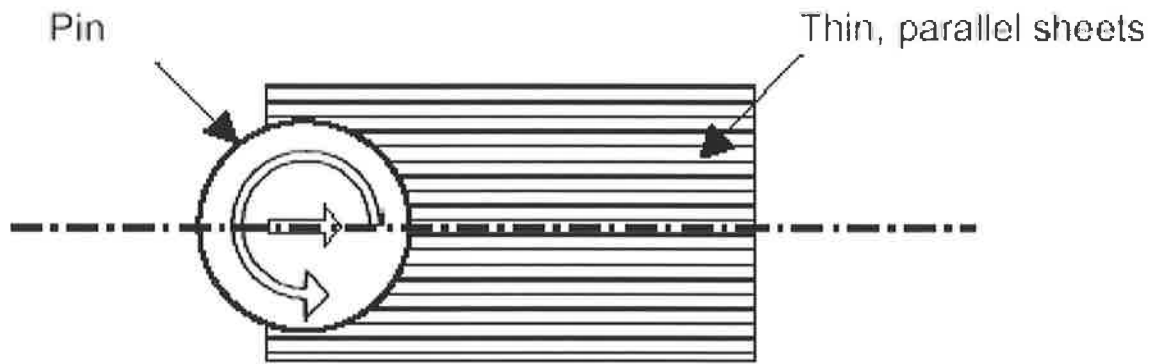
Schematic of planar markers placed parallel to the weld join line [59]
